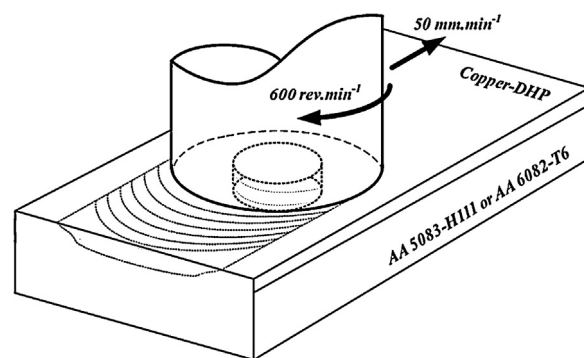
Schematic representation of Al/Cu friction stir welding.
